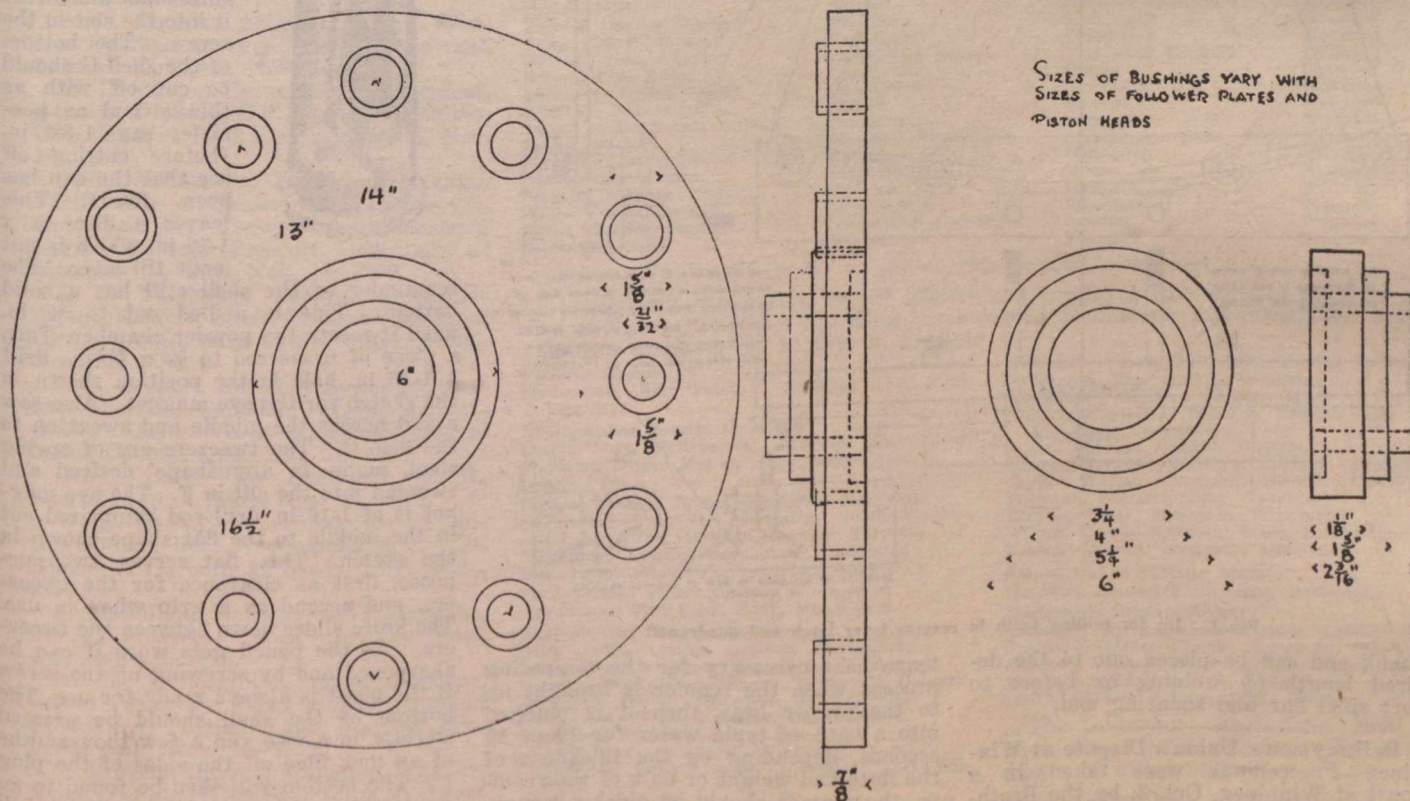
Jig for drilling holes in follower plates and piston heads.
